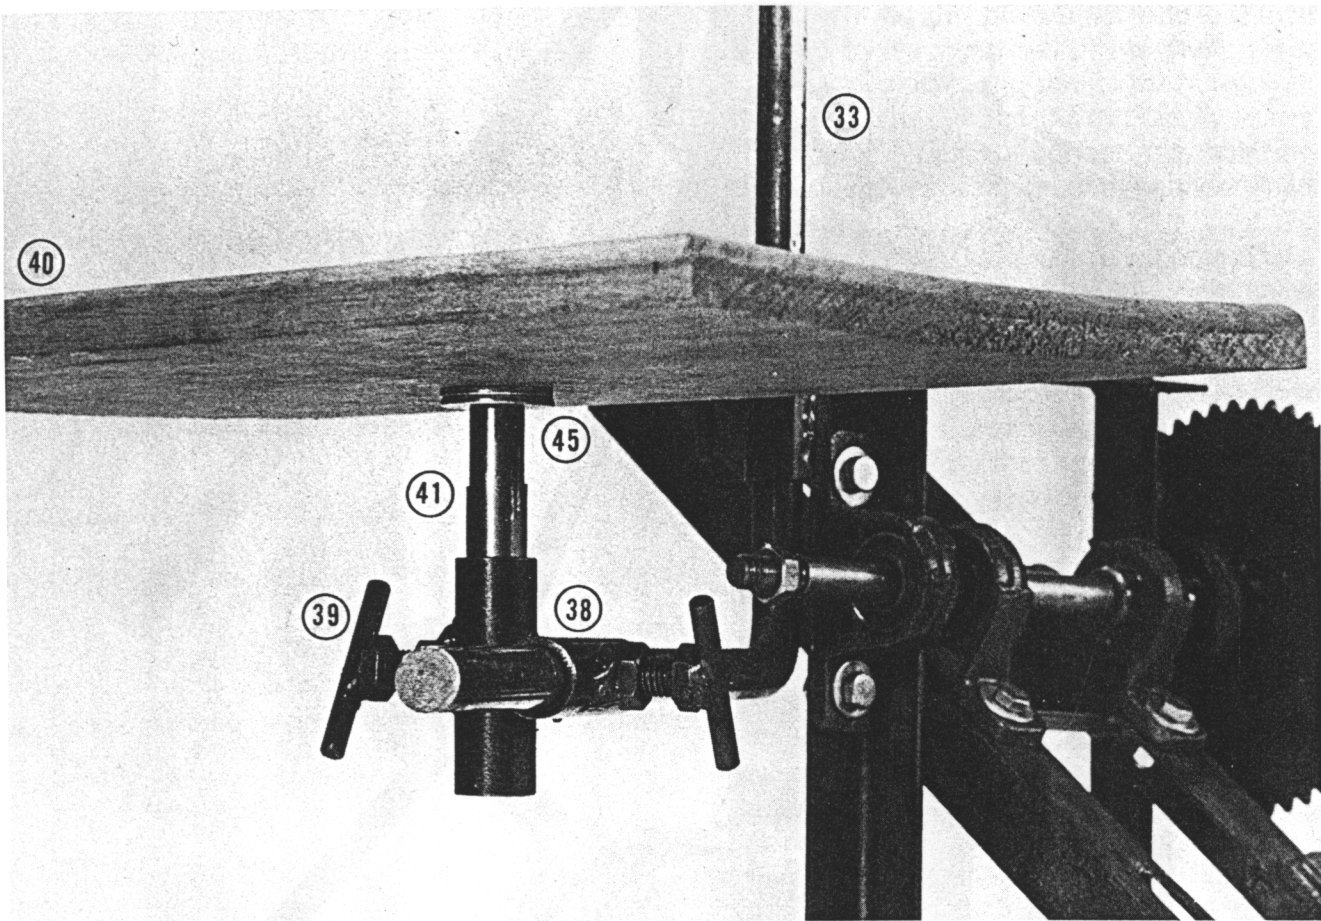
The table, which can be moved to most positions, offers a universal means of attaching various tools to the cycle.
